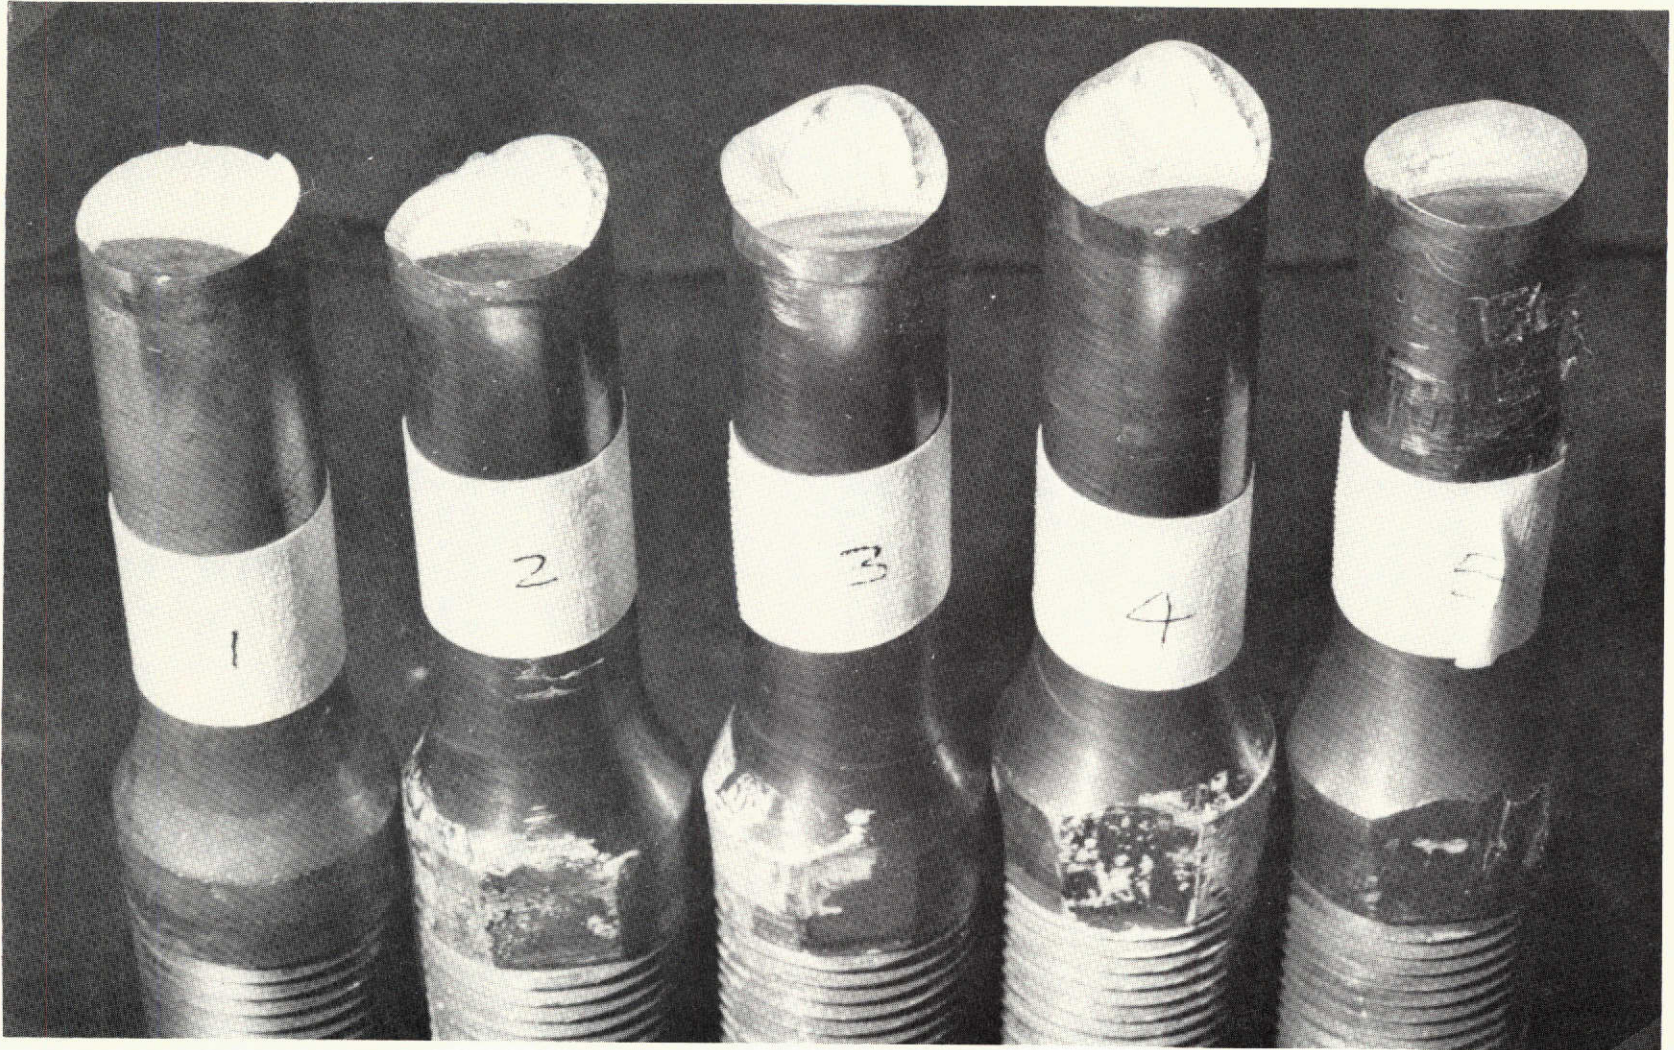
Fracture Surfaces of Surface Flawed Round Specimens of 4340 Steel
